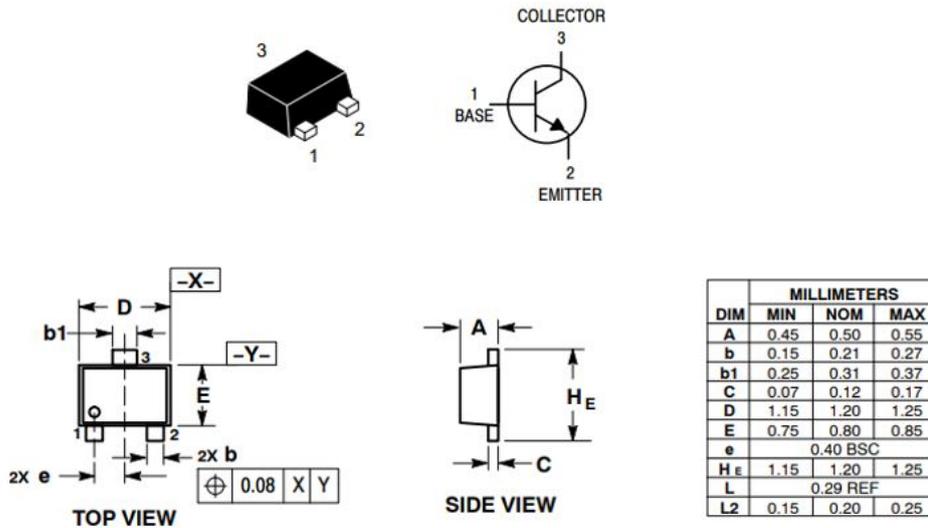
BJT MMBT2222AM3T5G pinout and dimensions
